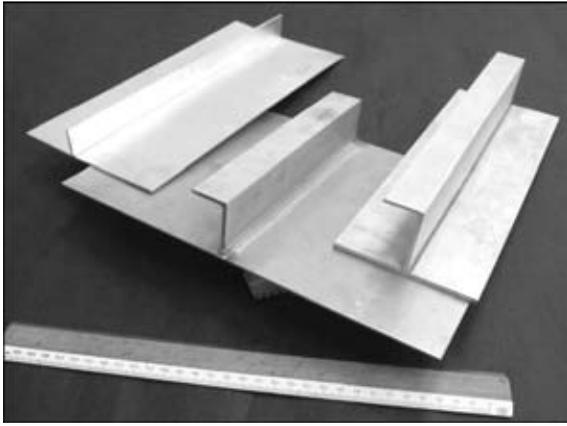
Fragments of thin-sheet stringer panels manufactured using EBW of single- and two-sided fillet welds
